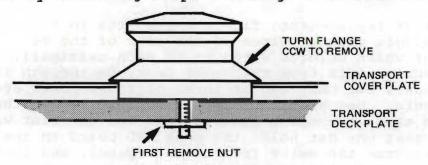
TAKEUP ROLLER GUIDE DISASSEMBLY
